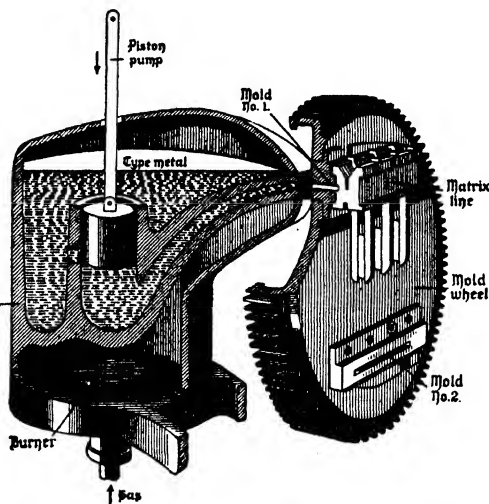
MELTING POT MOLD WHEEL, ETC., OF LINOTYPE MACHINE.
